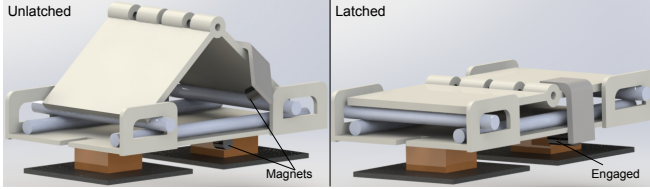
Magnetic latch mechanism with low effort of engagement and disengagement.
